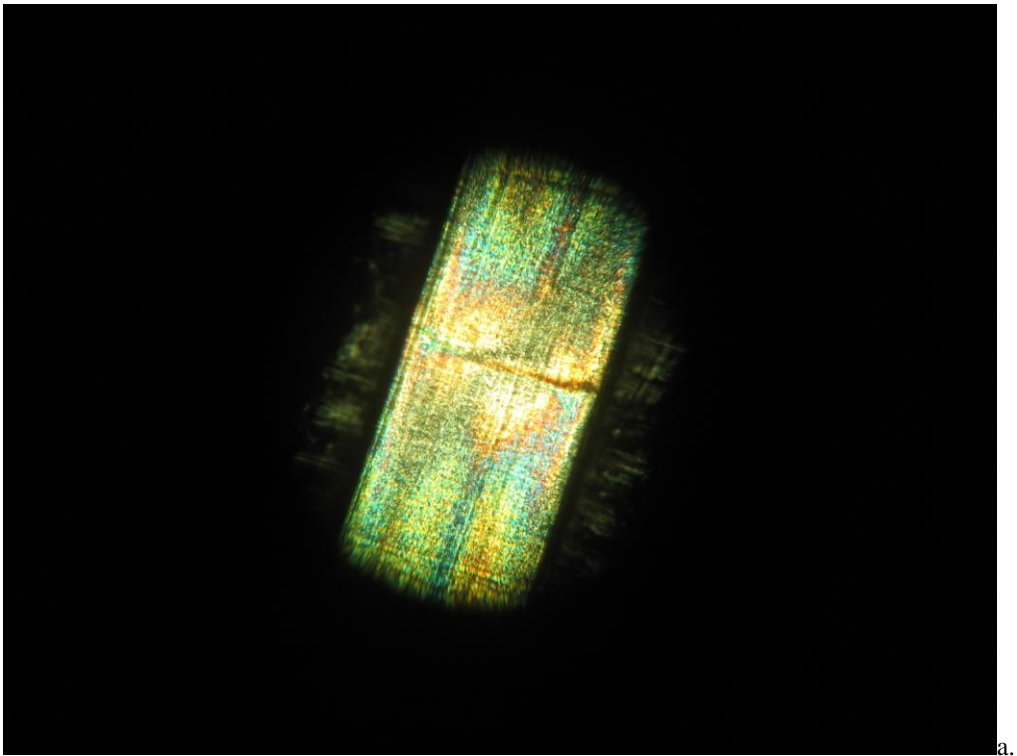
Weld line of micro tensile sample without ultrasonic oscillation;
